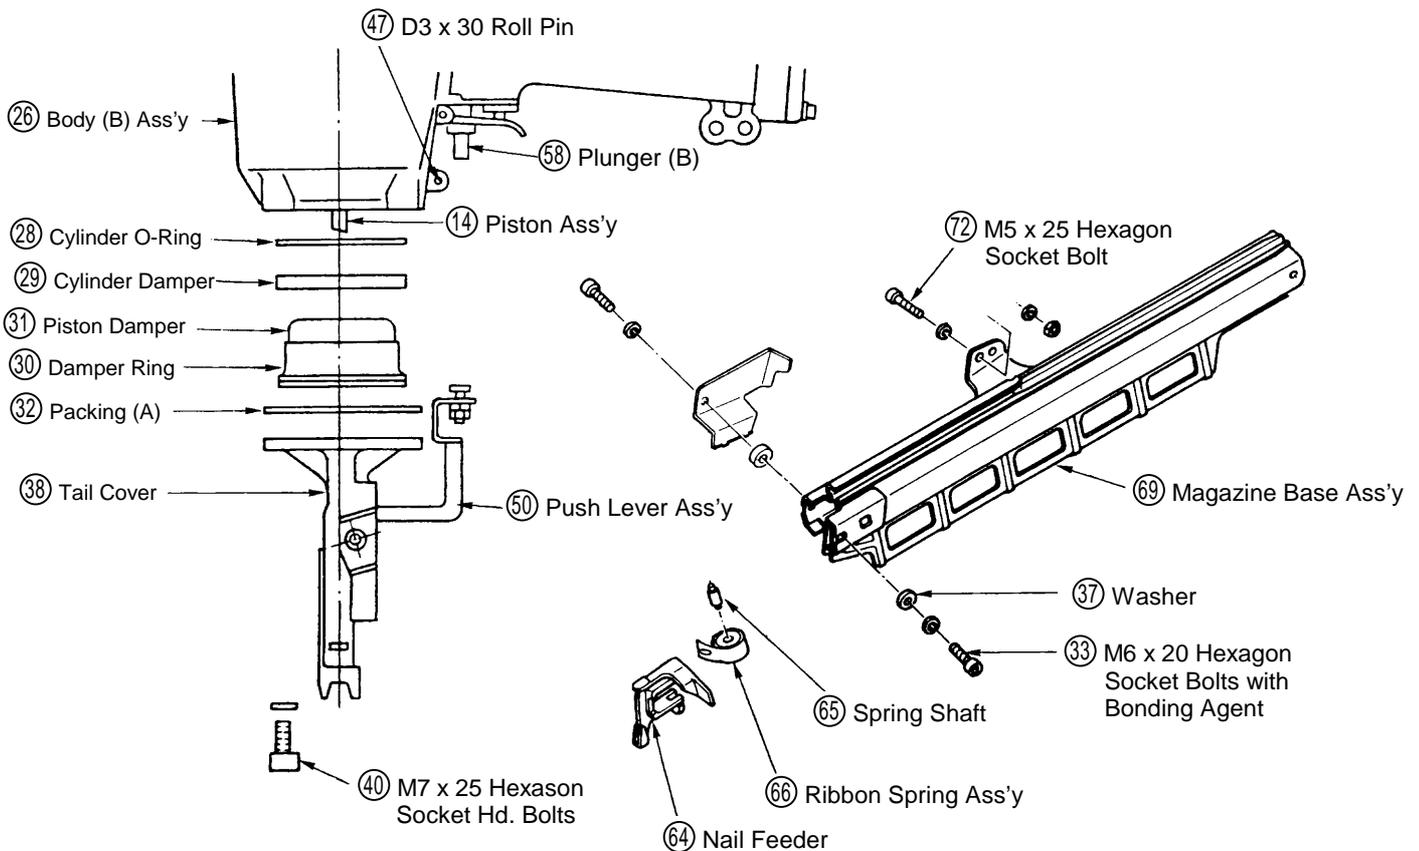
Disassembly and Reassembly of the Piston Damper, Packing (A), etc.
